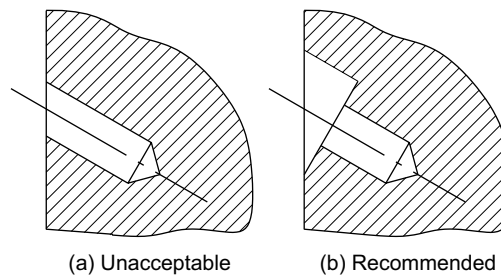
Drill axis should be perpendicular to the hole entry surface
